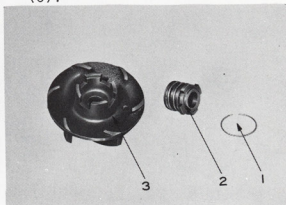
Water Pump Rotor V1268 Disassembly
